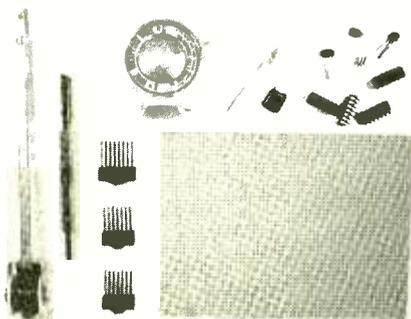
TWO TECHNIQUES are available for wire-wrap construction. The tools and materials required for both techniques are shown.
